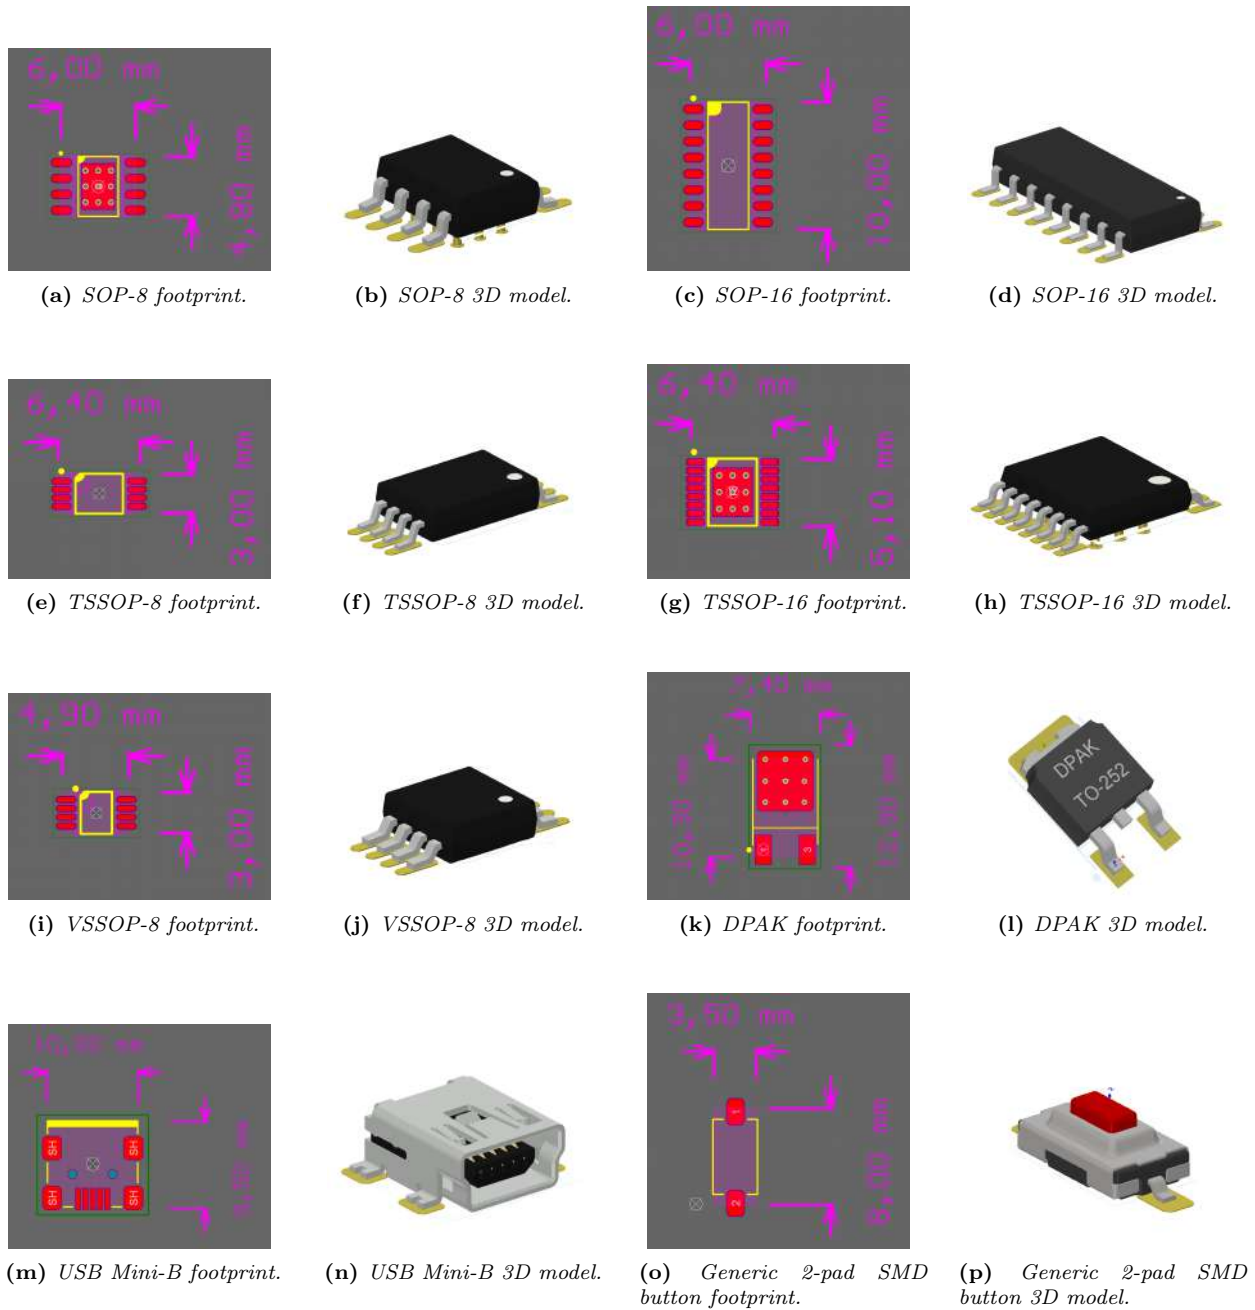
Footprints and 3D models of the different packages used in the PCB (part 2 of 3).
